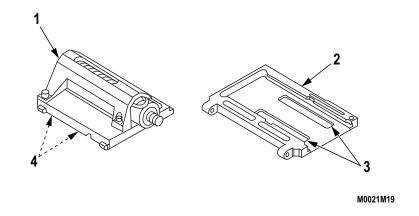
Feed Slide Assembly and Feed Tray Lubrication.
